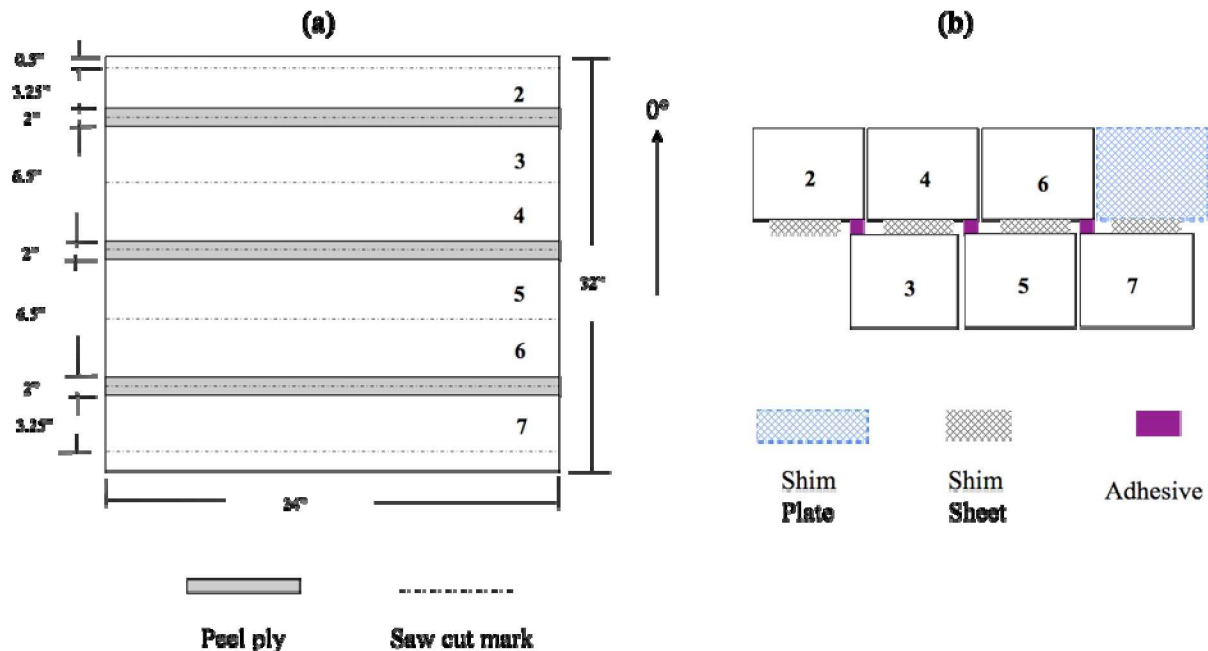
Schematic drawing illustrates lay-up, co-curing, trimming (Figure 1a, top view) and secondary bonding of composite/peel-ply/adhesive (Figure 1b, side view) in fabricating single-lap-shear specimens.
